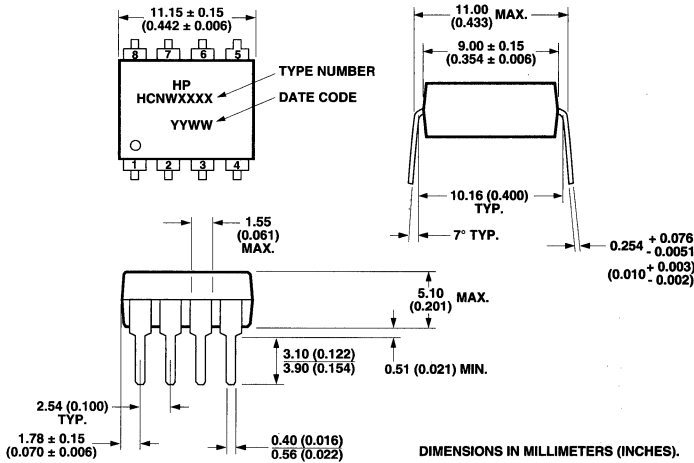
HCNW4506 Outline Drawing (8-Pin Widebody Package).
